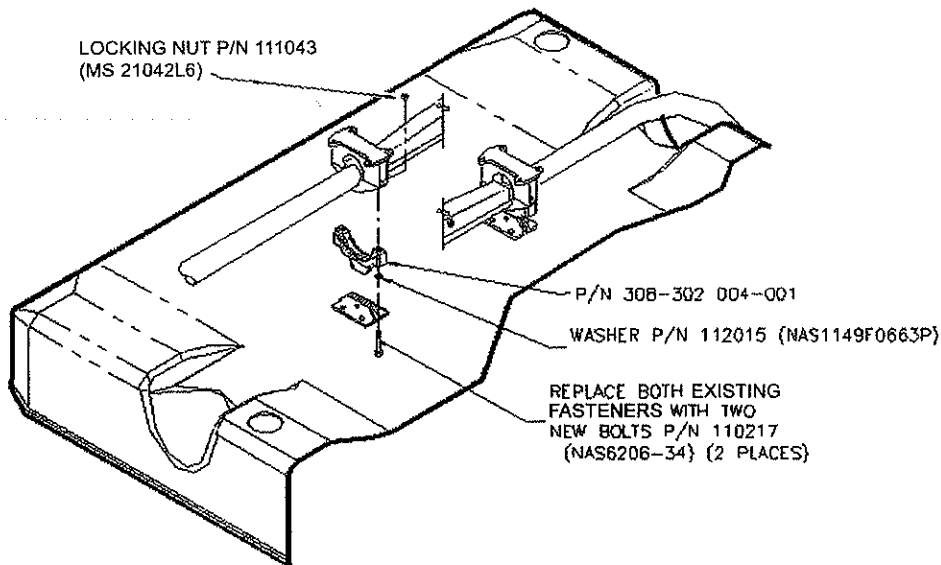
, Aft Rotorcraft Attachment Fitting Installation
